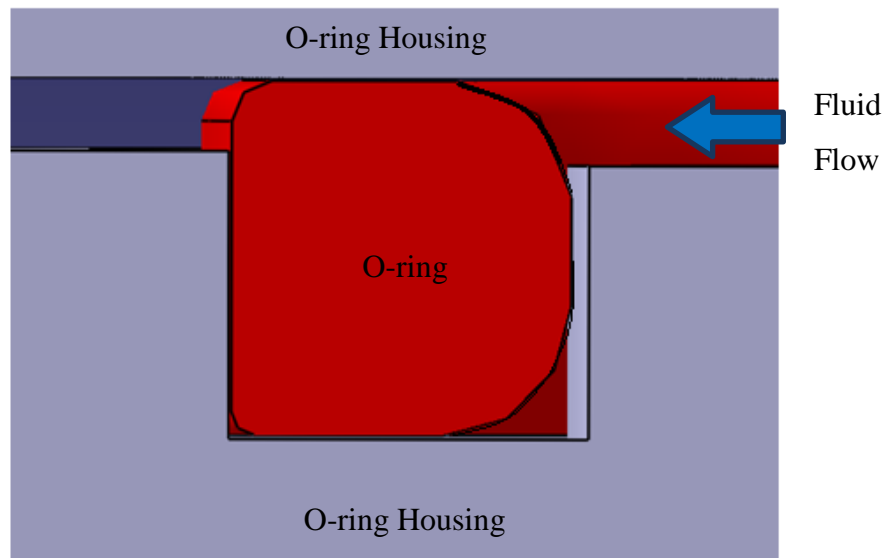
Display of a cross-sectional view of an O-ring compressed by the O-ring housing gland surfaces.
